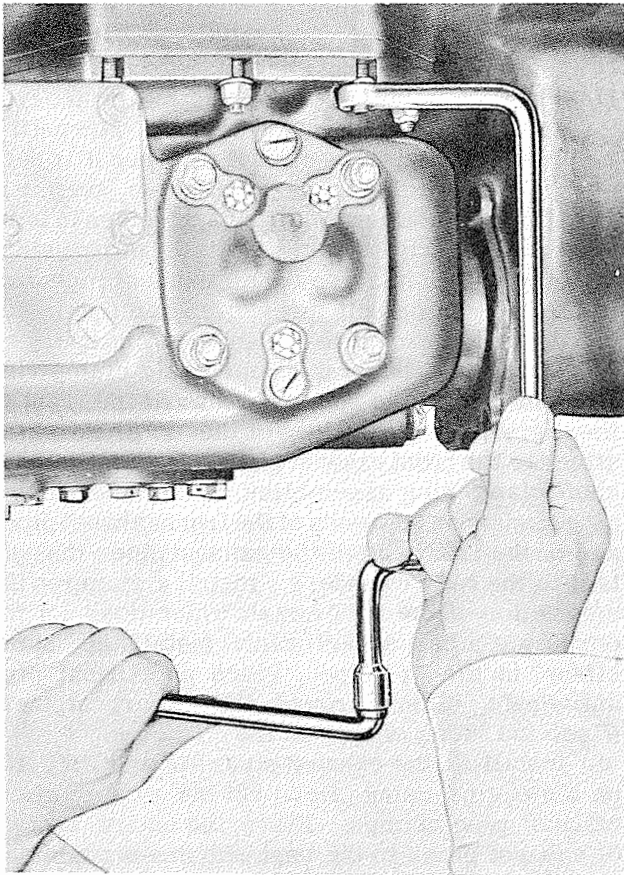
Removing Rear Oil Pump and Sump Housing Front Attaching Nuts
